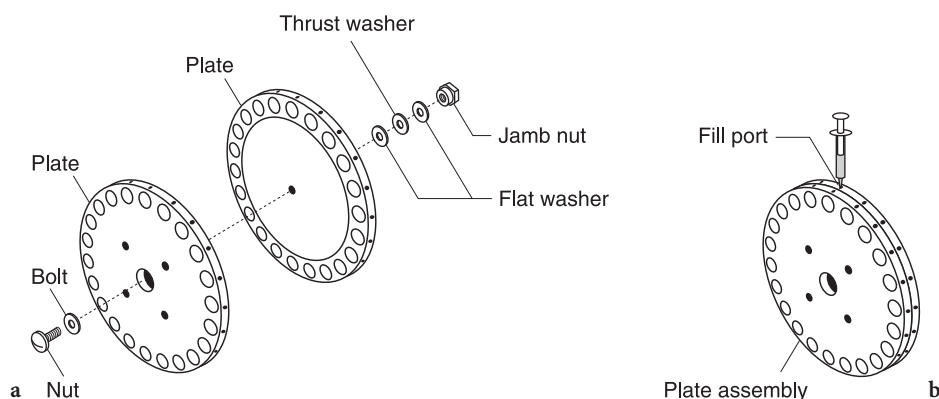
, b. Assembly of multistage extraction plates containing the chambers: a plates; b filling ports
